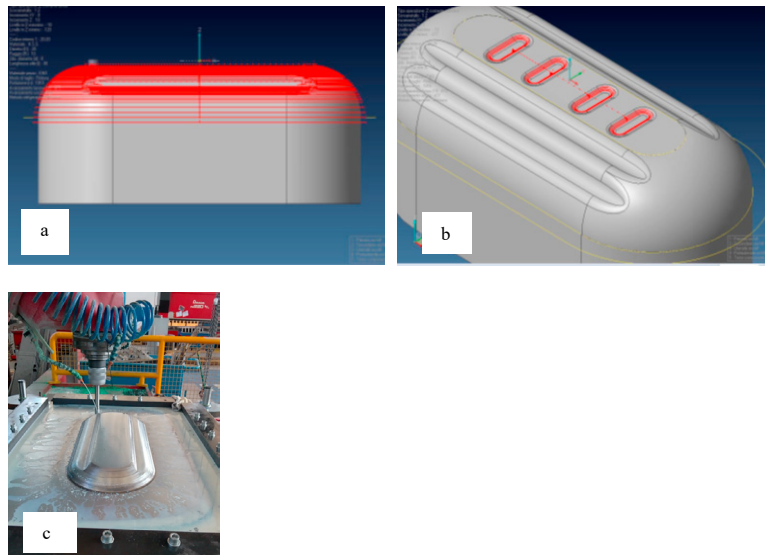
CAD design of the path performed by the tools during the forming; (a) general view, (b) details of the route performed (c) image of the effective forming route
